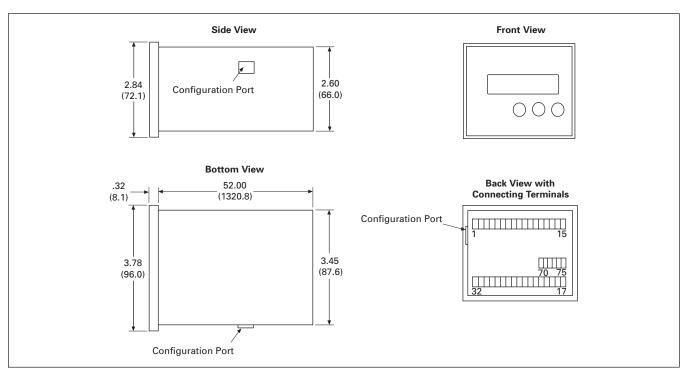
VR-300 — Dimensions in Inches (mm)
